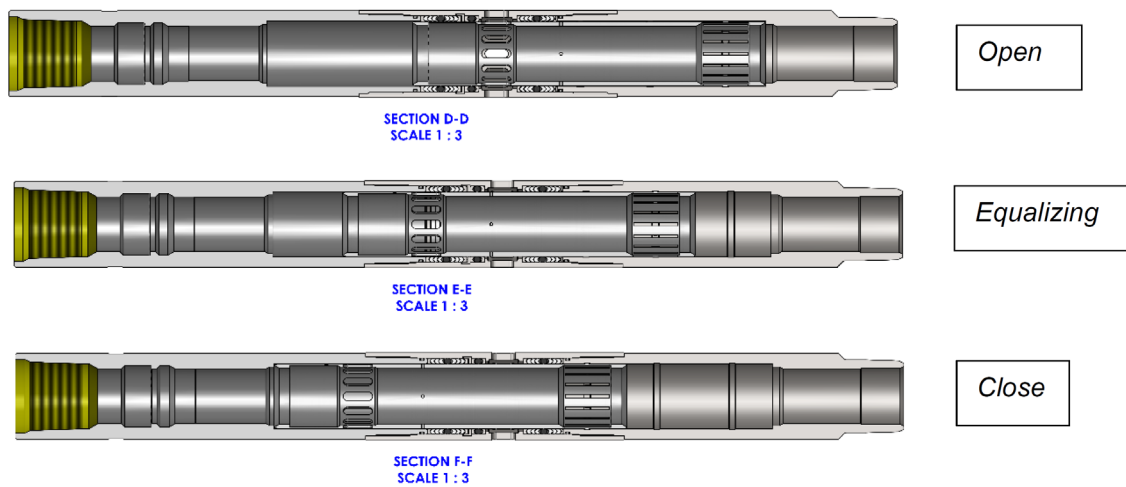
Schematic drawing of a sliding sleeve in open and closed position.
